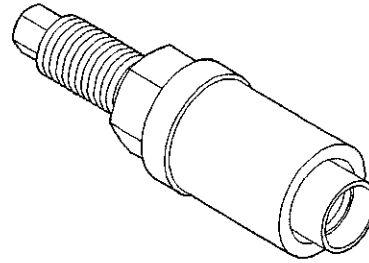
Crankshaft Sprocket Installer Tool 3718
